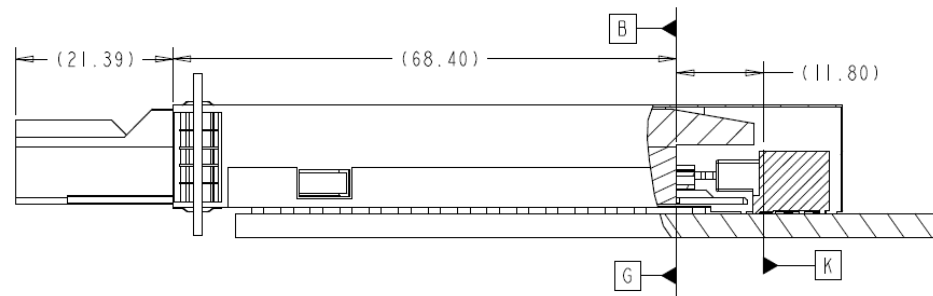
Side view of a 1x1 cage with vertical cage dimensions
